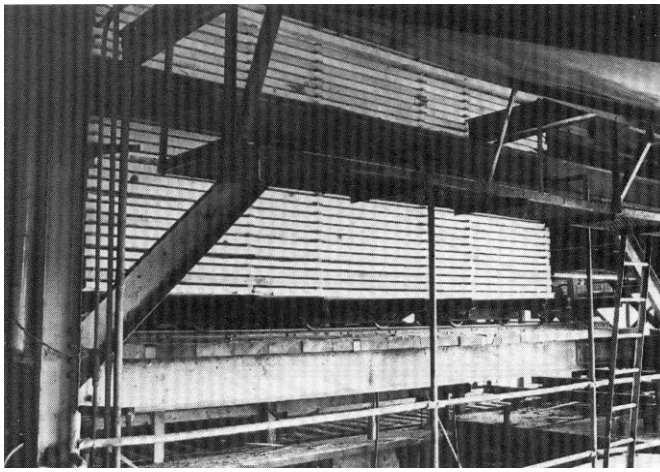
Lumber stacker showing hydraulic lift that keeps the top of the stack at working height. (MC688 9010)
